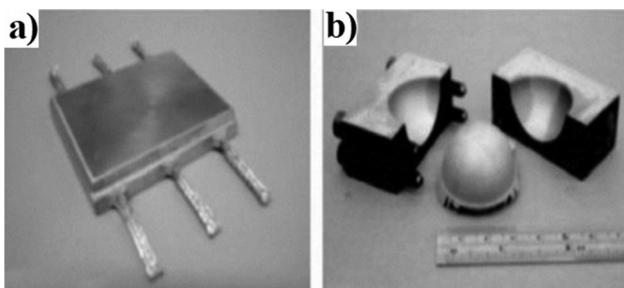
(a) Three sheathed thermocouples embedded within a titanium part and (b) titanium hemisphere formed by mould tool [55].
